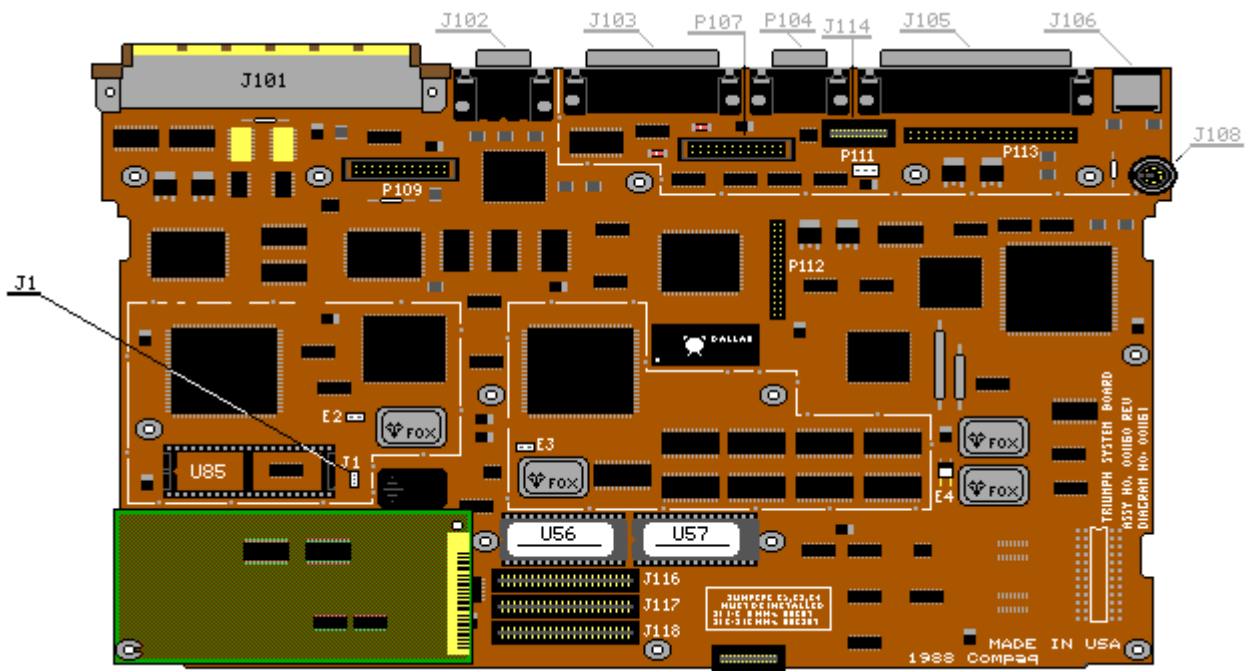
Jumper on the COMPAQ SLT/286 System Board (Assy No. 001160)
